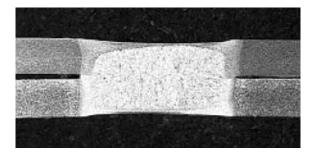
Spot weld section. (*VW 01105-1*)
